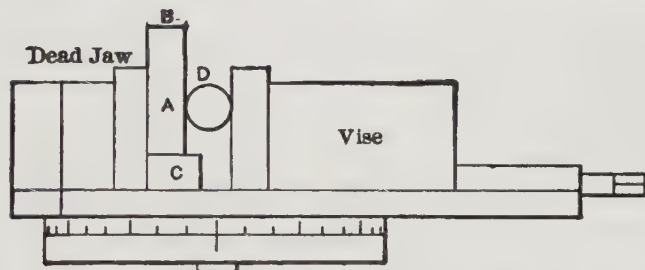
Device for Getting True Work in a Planer Chuck.
